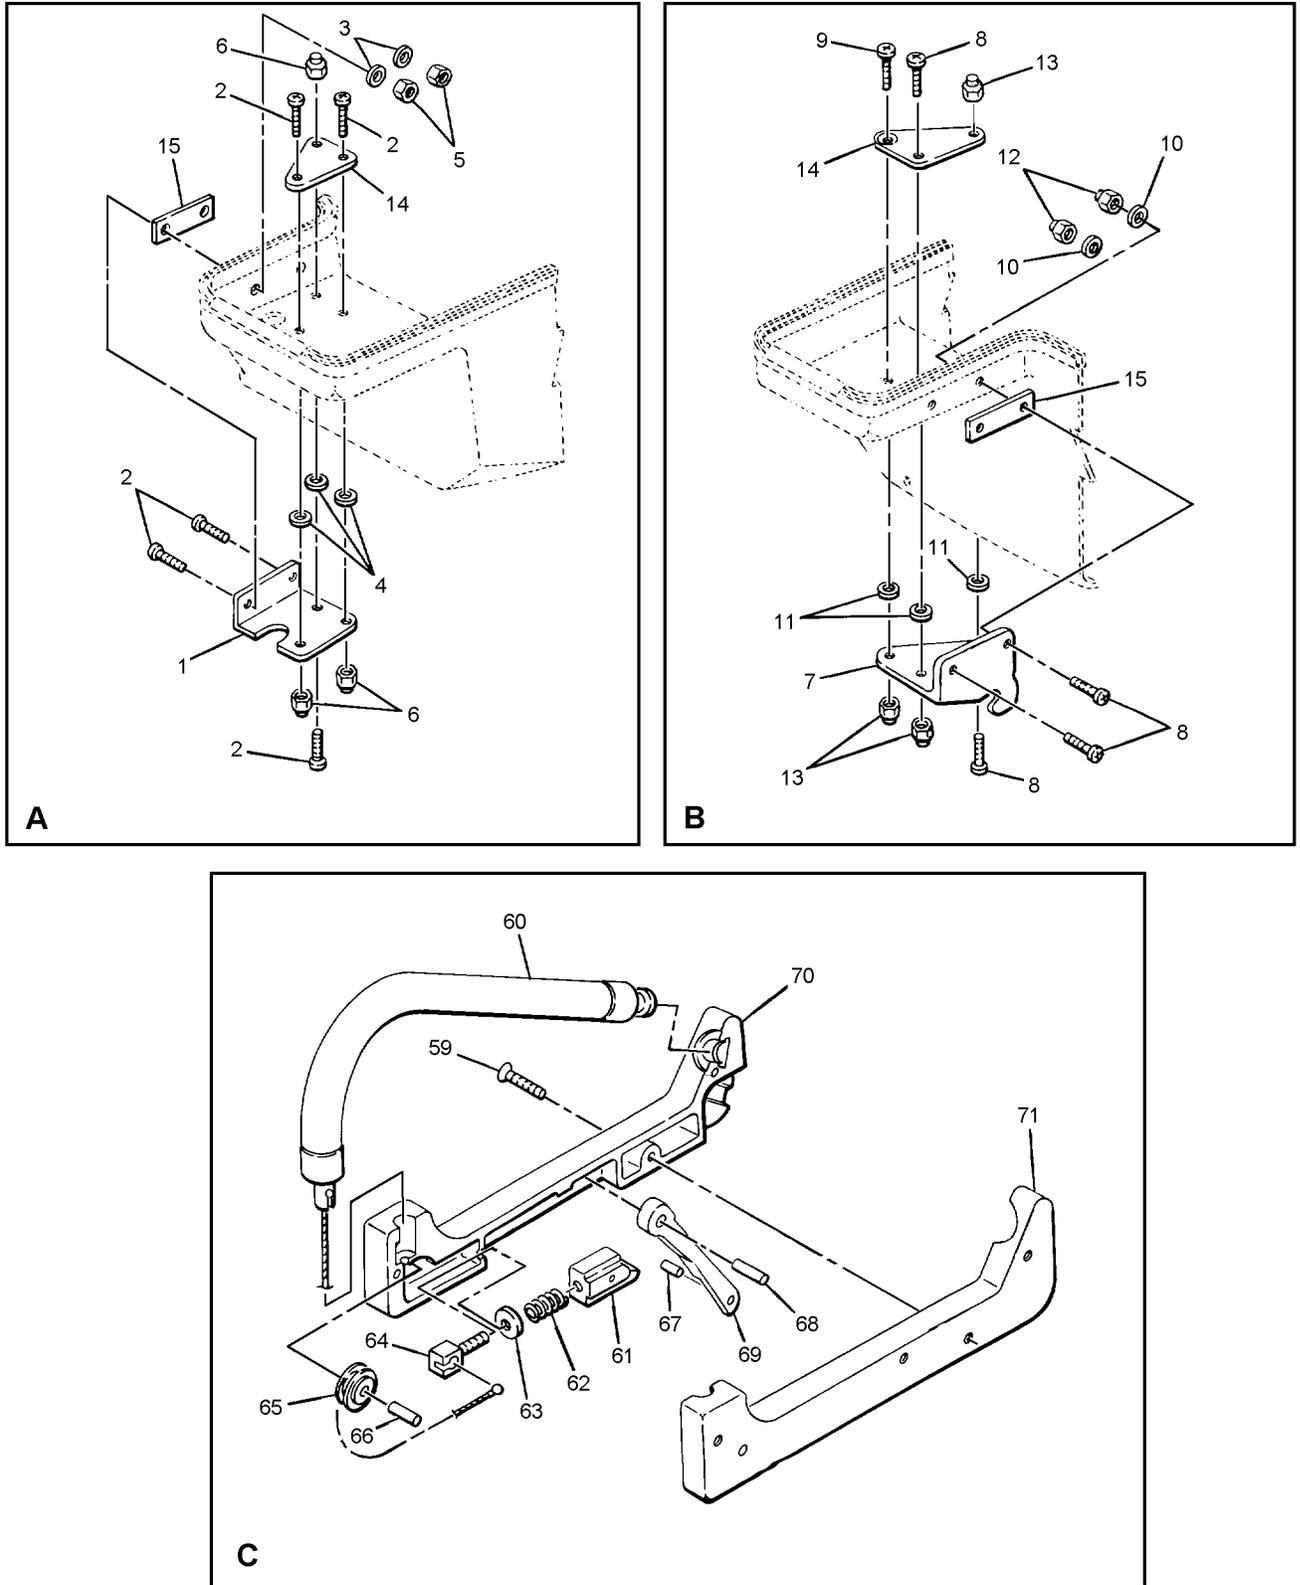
Lower Container Assembly (Rocket Jet P/N 283100-7) and Handle Assembly (Rocket Jet P/N 347170-1) (Sheet 2 of 2)
